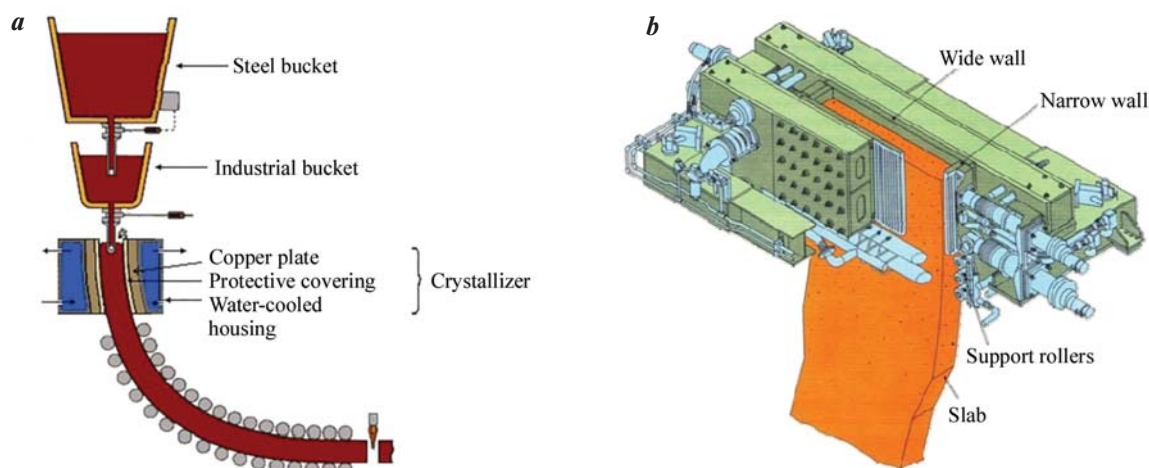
Schematic view of the slab continuous casting machine (CCM) (*a*) and mold design for the slab CCM (*b*)
